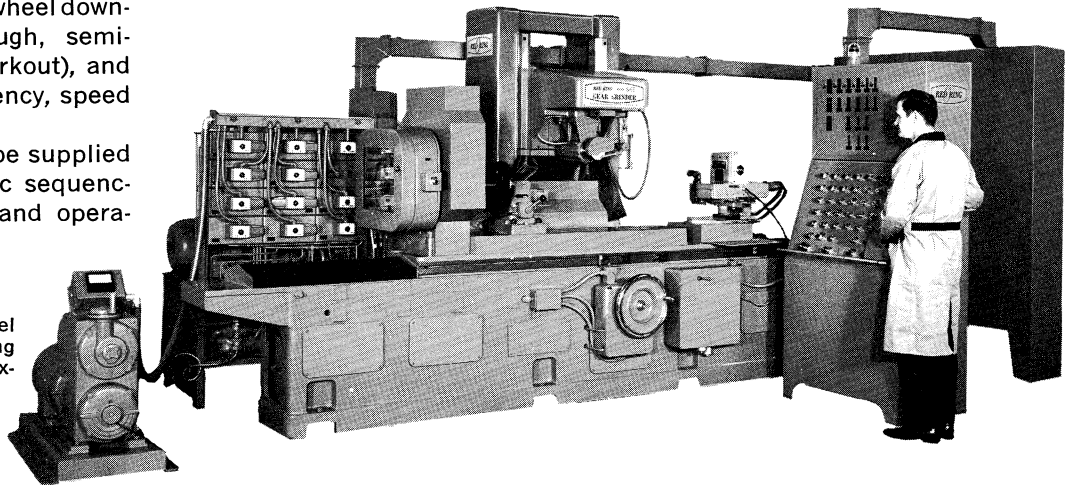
Red Ring Model SGL-12 in. gear grinding center for internal or external spur gears.
